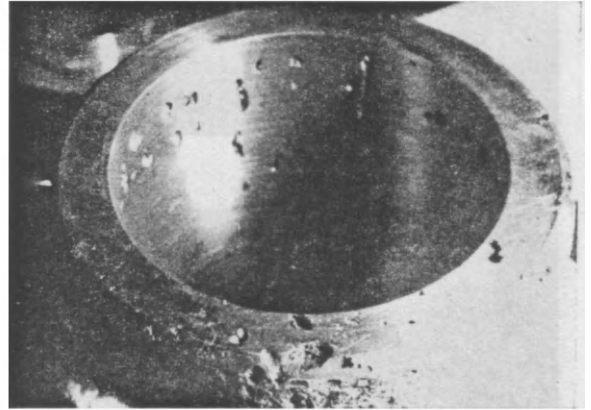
Porosity in valve flanges where exothermic pads were not used.
